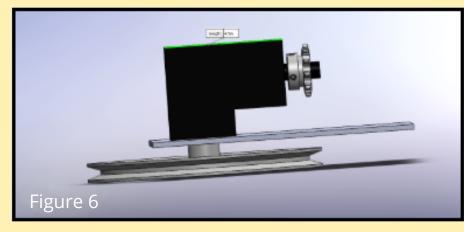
90 degree gearbox with 2" diameter sprocket on the input shaft and 9" diameter pulley on the output shaft. Input sprocket is driven by the bike chain. The output pulley drives the drum pulley with a v-belt.
